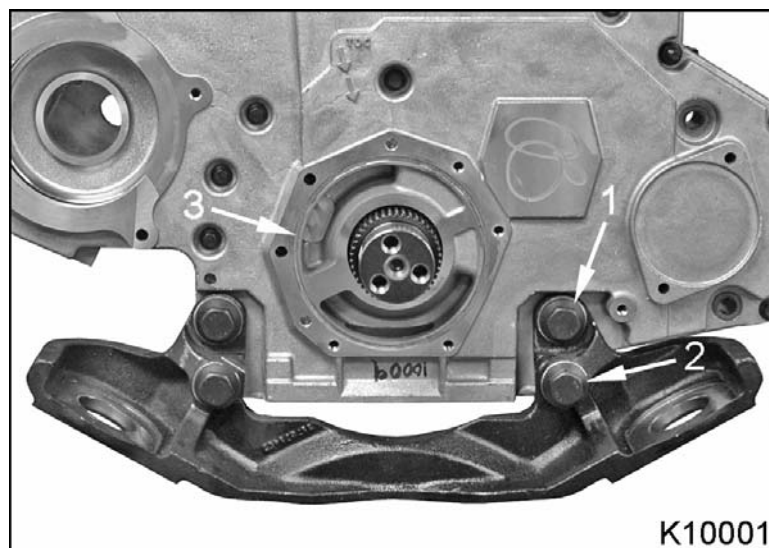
Vibration damper key, inner rotor, and oil pump housing plate
